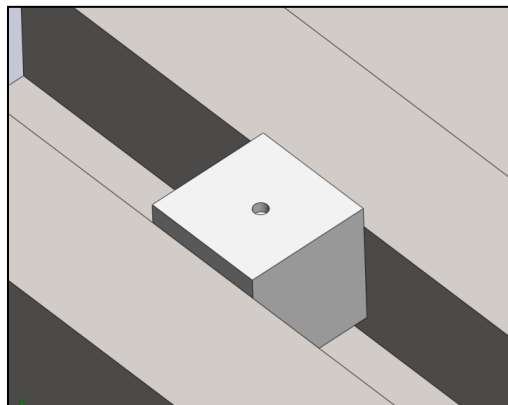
A 3.5 mm diameter, 2.5 mm deep hole will be drilled 0.875 mm to the right of center on the top face.
